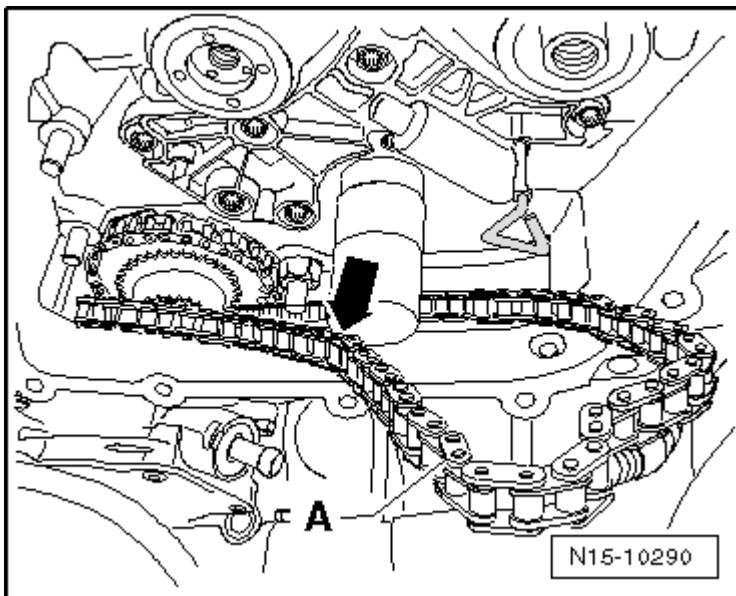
Counter-Holding Crankshaft Toothed Belt Sprocket With 3415
